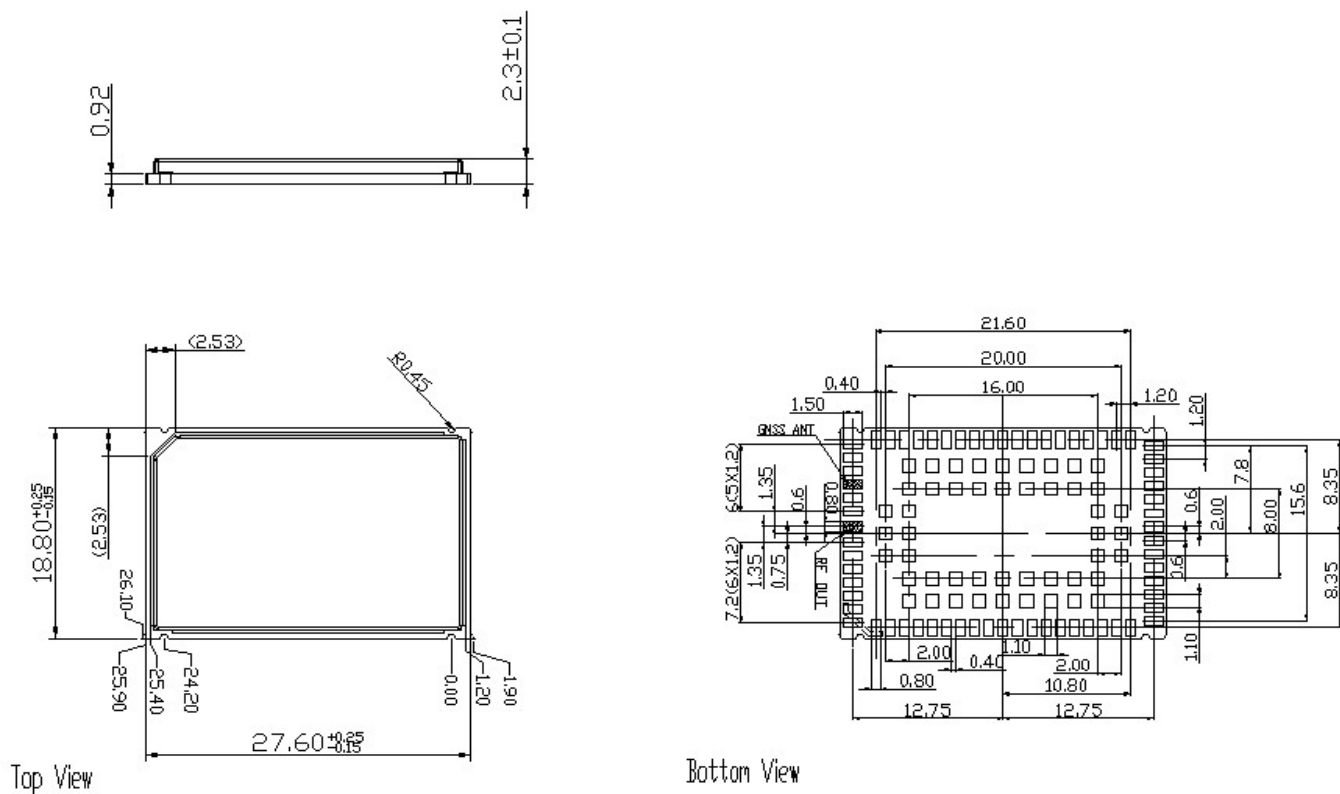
Dimensions of EXSx2-W (all dimensions in mm)
